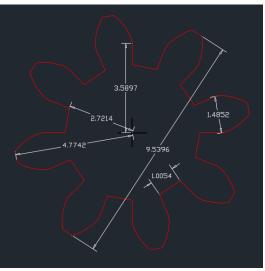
8 Toothed Gear AutoCAD Drawing, Dimensions in mm
